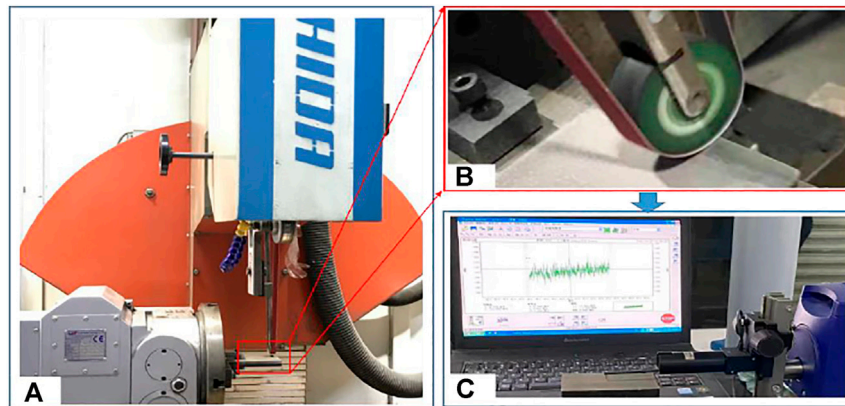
| Experimental equipment and testing equipment. (A) Seven-axis six-linkage CNC belt grinding machine. (B) Abrasive belt grinding process. (C) Roughness detection of superalloy.
